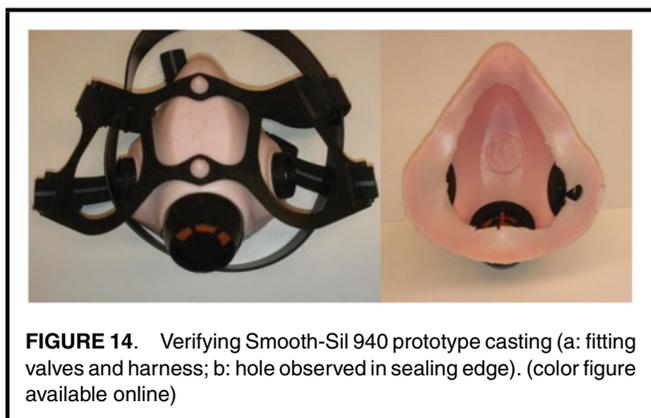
Verifying Smooth-Sil 940 prototype casting (a: fitting valves and harness; b: hole observed in sealing edge). (color figure available online)
